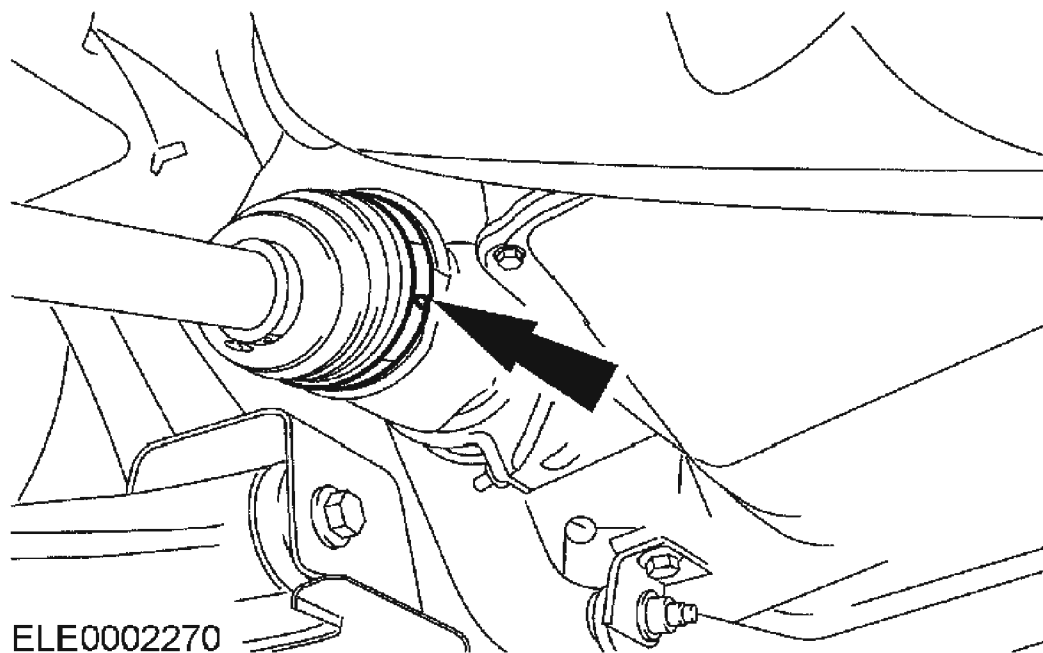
Detaching Right-Hand Front Drive Halfshaft From Intermediate Shaft
